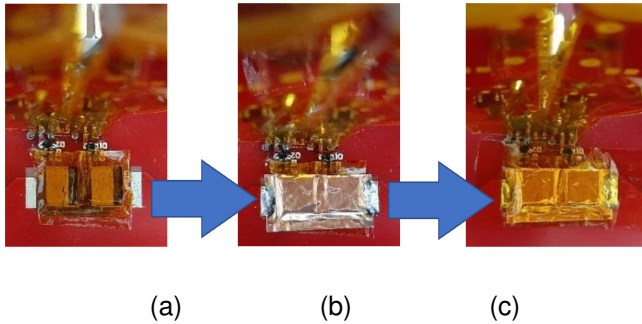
Stages of thermal pad shield application: a) placing 1st insulation layer on thermal pad of GaN package, b) applying copper foil shield and soldering it to the bus-bar, c) placing 2nd insulation layer between shield and grounded heat sink
